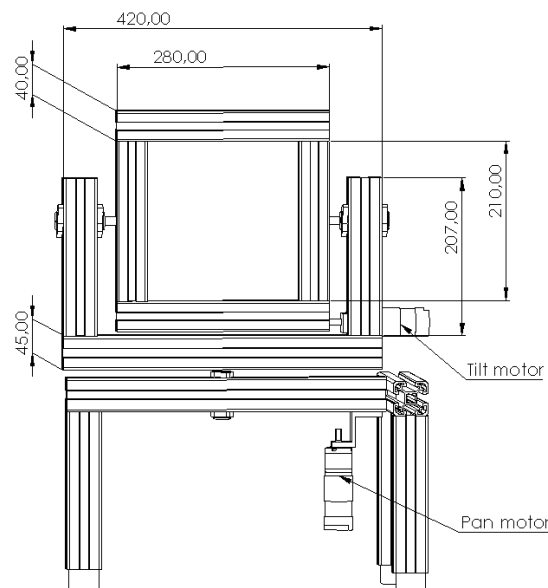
Technical drawing of the pan-tilt system. All dimensions are in mm.
